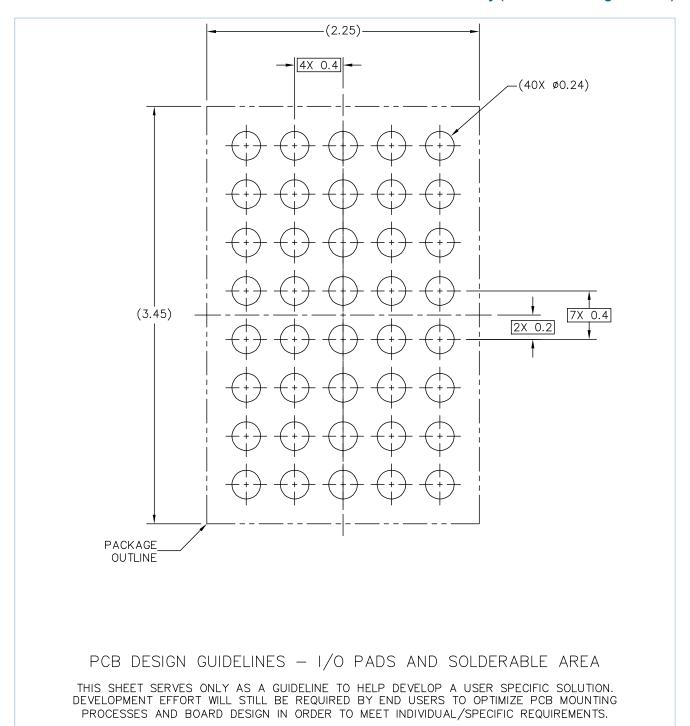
Reflow soldering footprint part2 for WLCSP40 (SOT1942-1)
